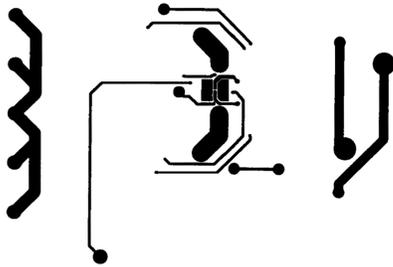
Recommended 20-pin DSBGA PC Board Layout: Upper Inner-Layer Layout
